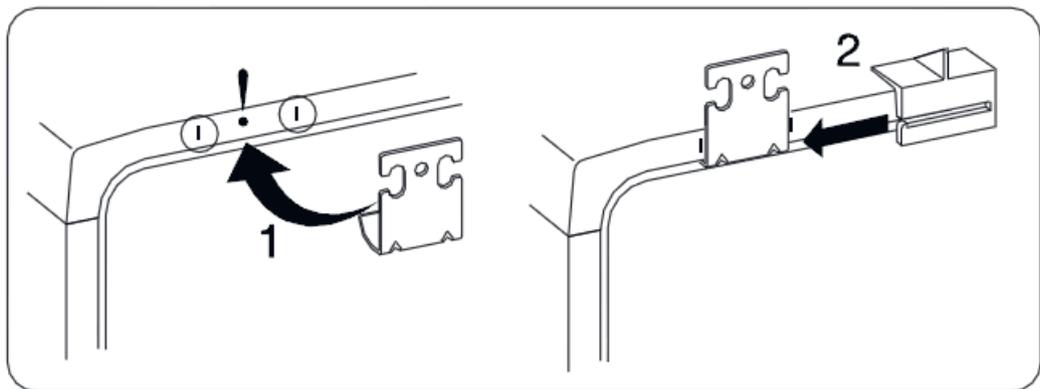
Hook the mounting lug in position and attach the securing bracket - example of top mounting
